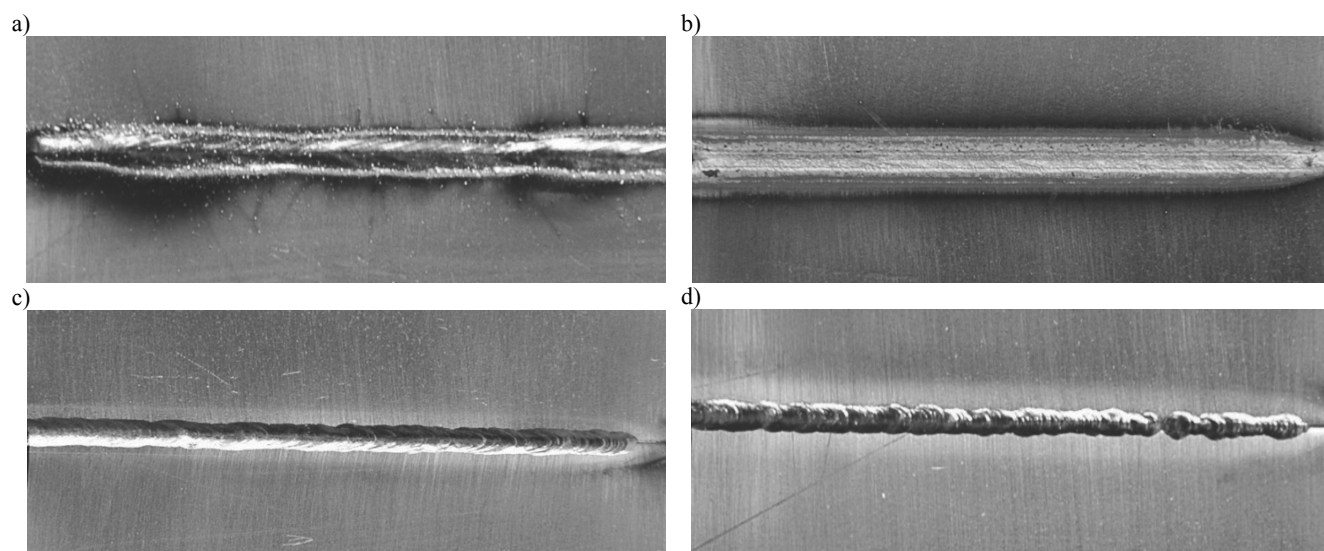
A view of butt joints of titanium alloy Ti6Al4V sheets 2.0 mm thick laser welded with the TRUMPF TruDISK 3302 (Table 6); a), b) weld face and groove of the W3 joint, c), d) weld face and groove of the W6 joint
